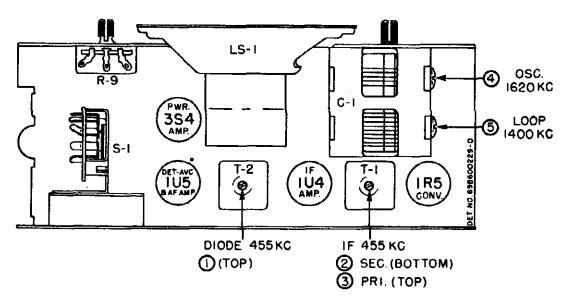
TUBE AND TRIMMER LOCATIONS
